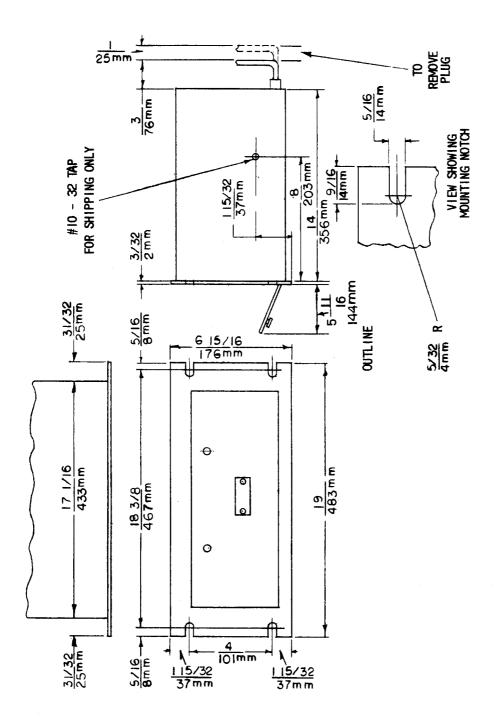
(0227A2037-0) Outline and Mounting Dimensions for the Type SLA55B Relay
